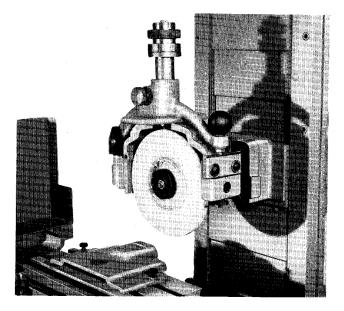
Over-the-Wheel Truing Attachment shown with wheel guard cover removed.
